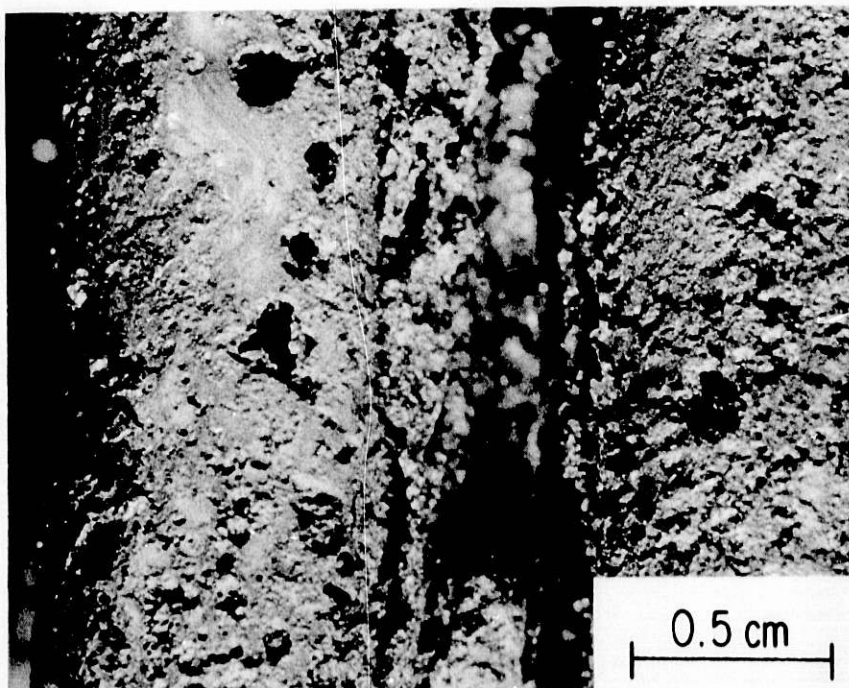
Photograph of Inner Surface of Failed U-Gas Expansion Joint Bellows, Showing Corrosive Attack and Pitting.
